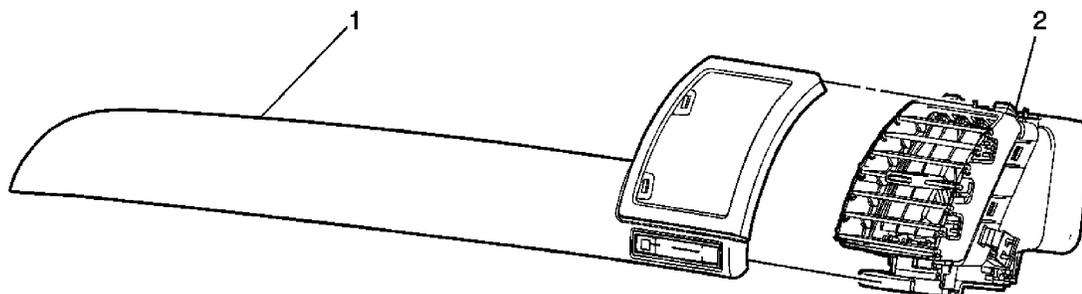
View Of Right Side Instrument Panel Outer Air Outlet
